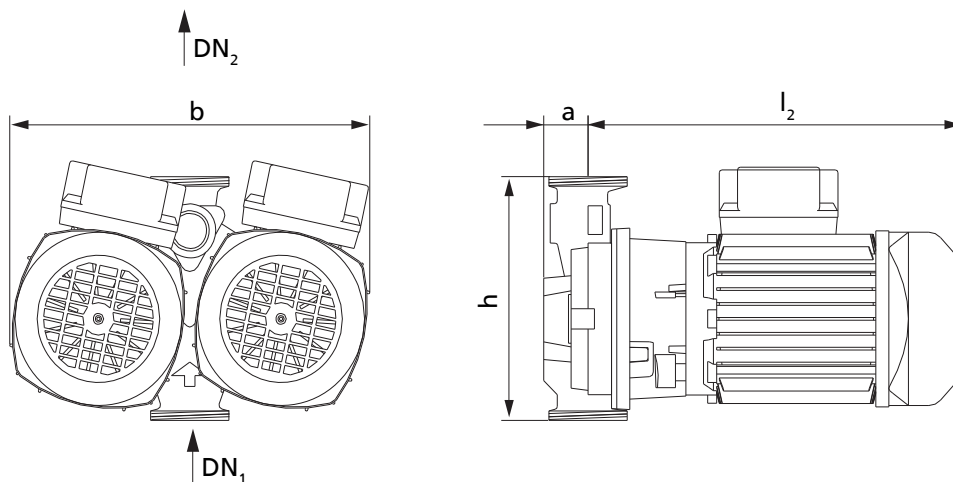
Dimensions of screw-ended pump set, size 032-032-080
